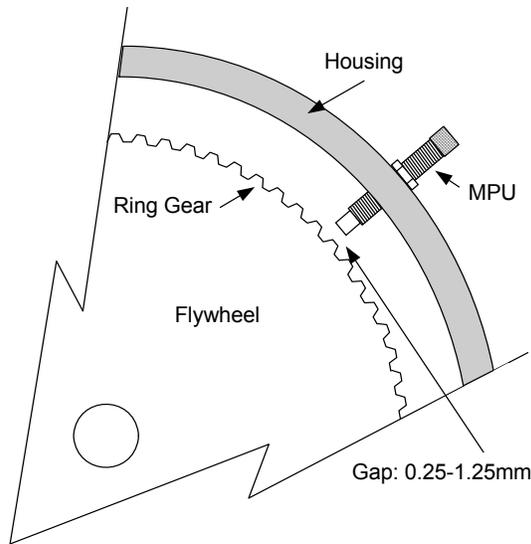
Magnetic Pickup Mounting in Flywheel Housing
